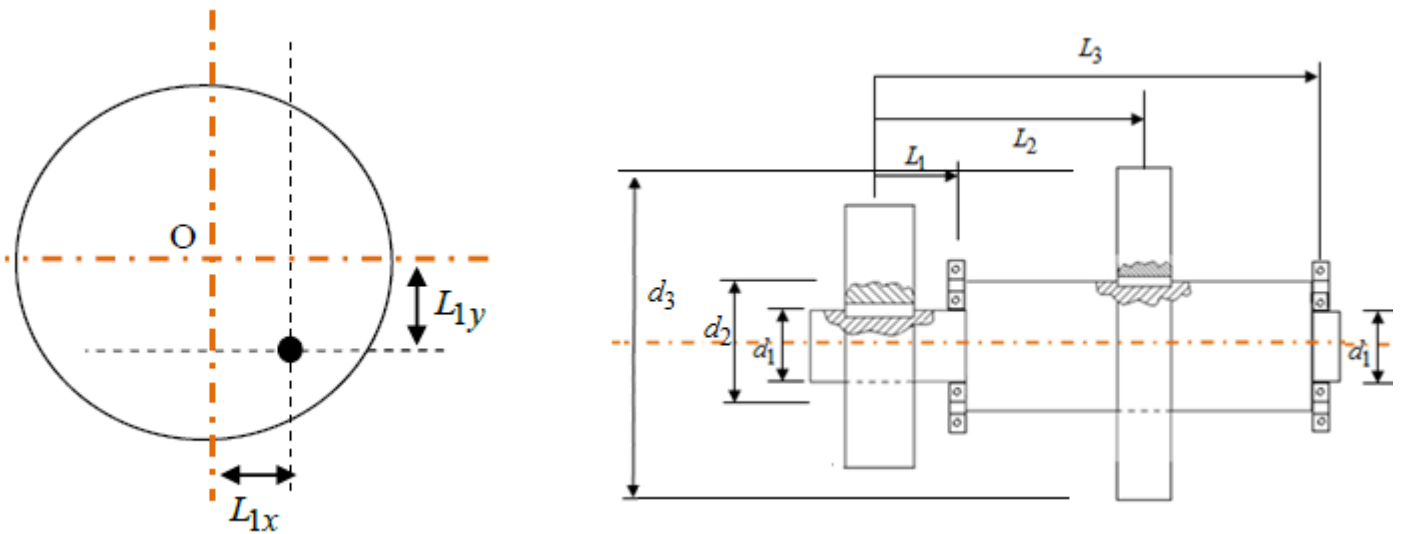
Front view of the crank (5) at the maximum torque case and the Shaft (4).
